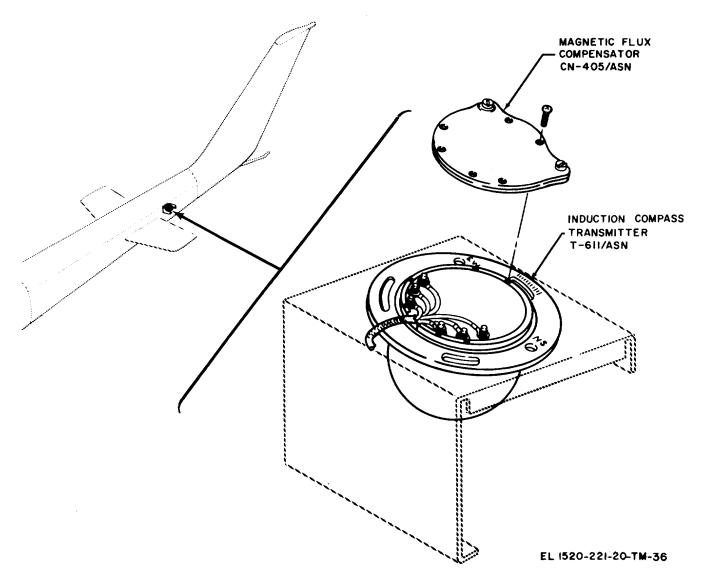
Transmitter, Induction Compass T-611/ASN.
